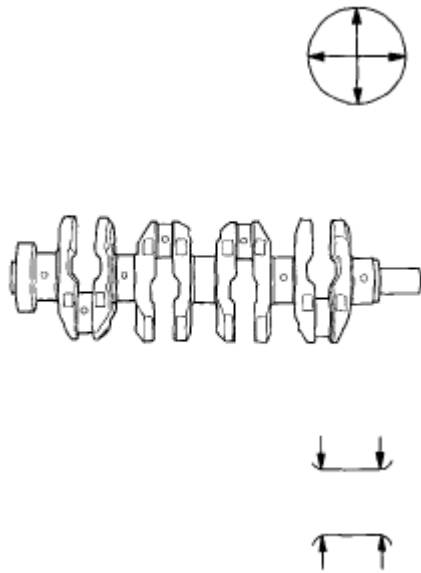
Identifying Crankshaft Journal Out-Of-Round
